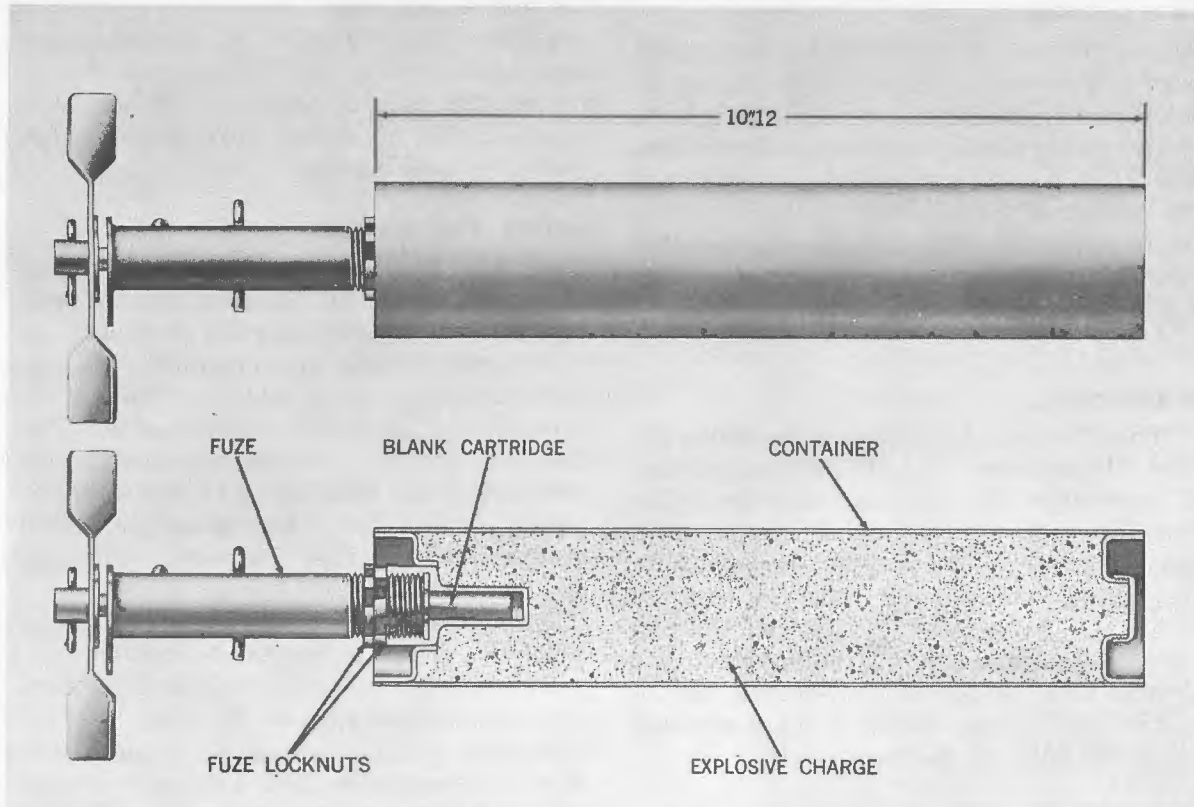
Practice Bomb Signal Mk 7 Mod 0, Assembled with Fuze.
